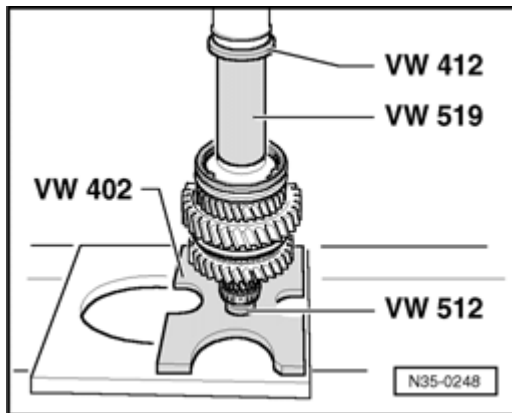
Pressing on 3rd and 4th gear synchro-hub with locking collar
